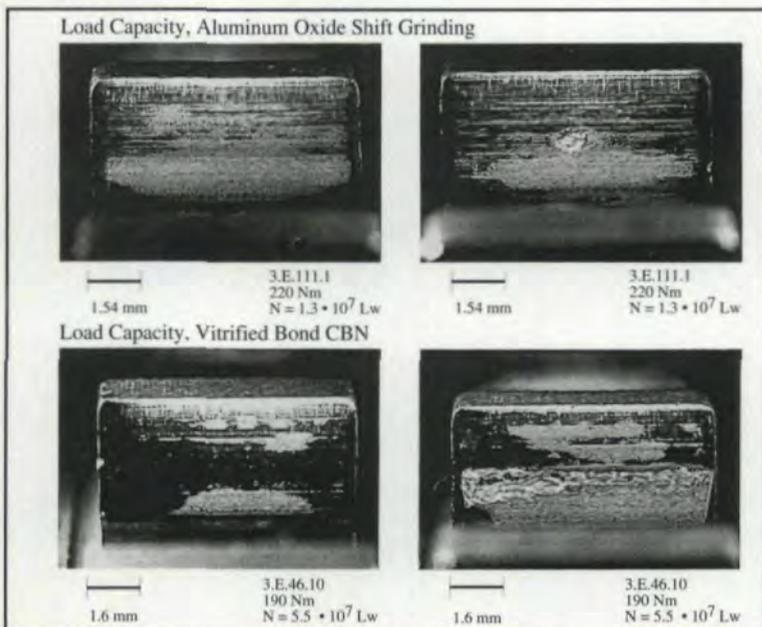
Wear and pitting on aluminum oxide and CBN ground gears (Variants 111, 46).
